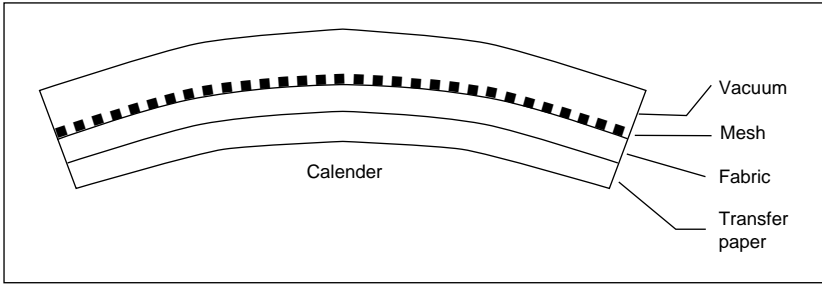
Continuous transfer printing under vacuum conditions (Kleinewefers DSV 1200 machine)
